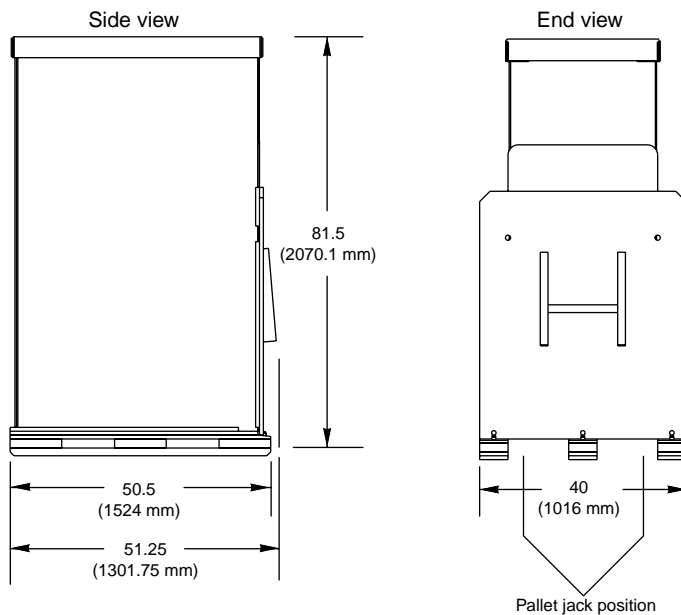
Dimensions of Tall Rack Shipping Crate
